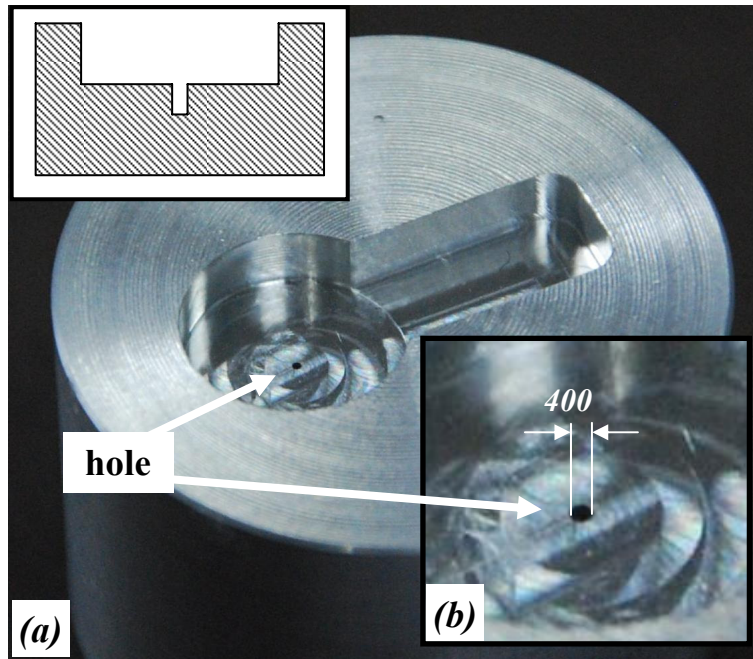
Aluminum template for fabrication of single pillar samples. (a) A cavity is milled into the aluminum block with a hole in the middle. (b) Close-up of the milled hole. The inlay in the upper left corner shows a schematic cross section of the mold.
